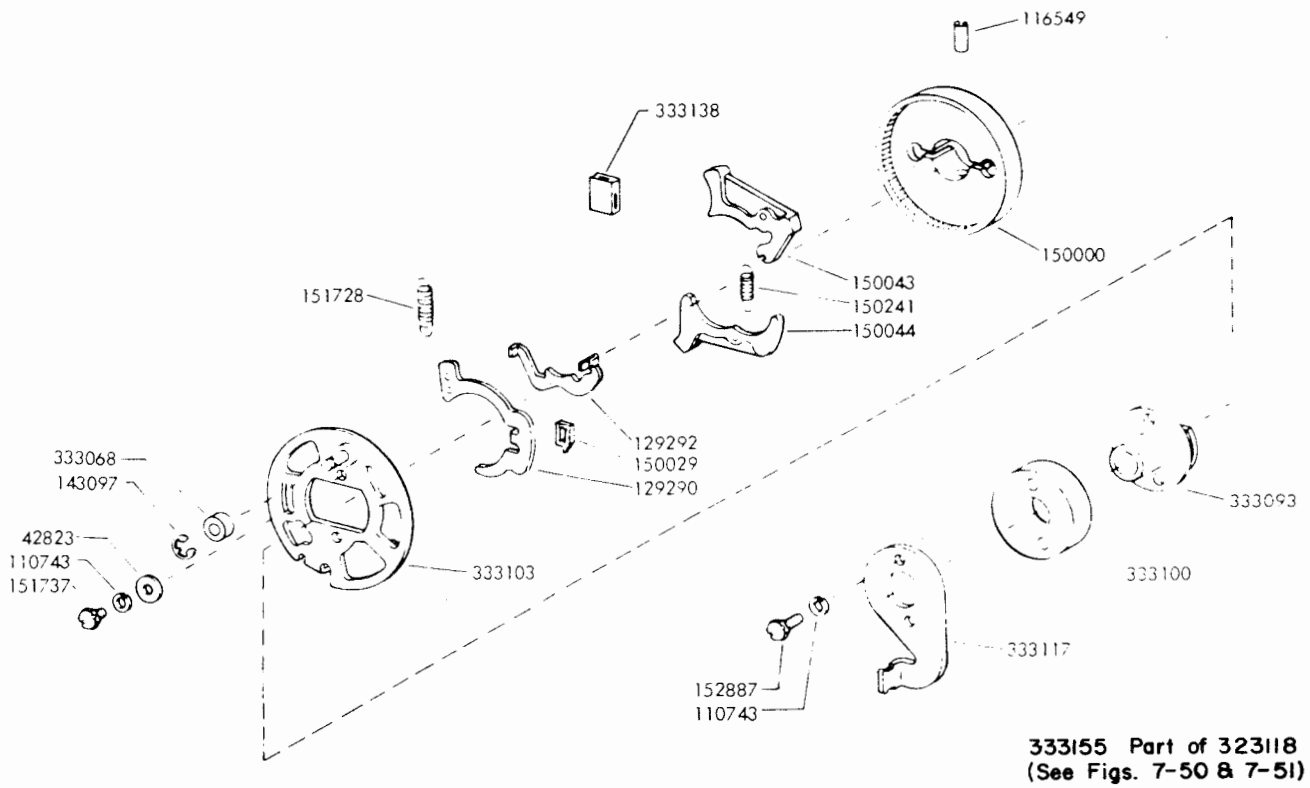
333155 Distributor Clutch Assembly - Used on Low-Level Sets
